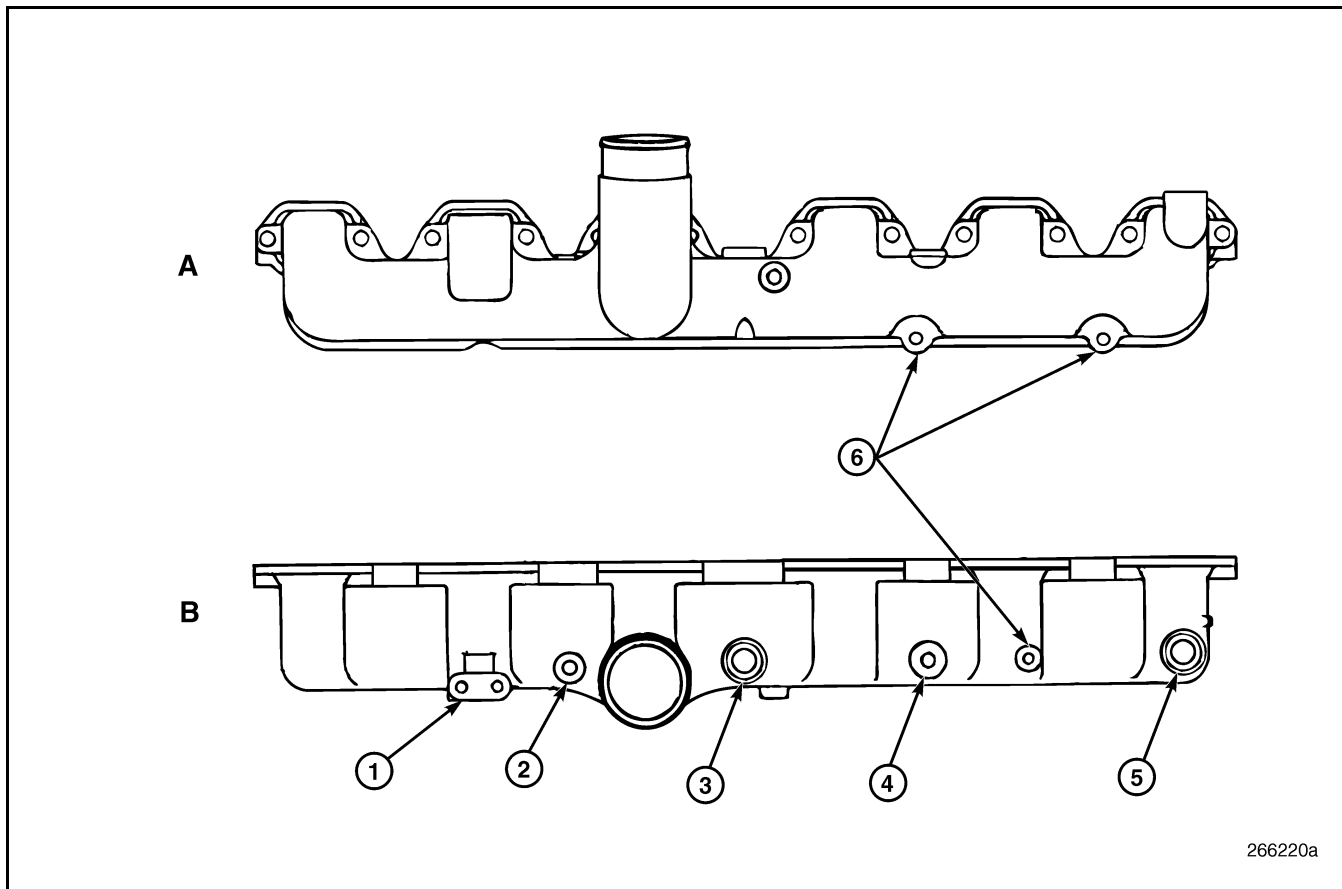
V-MAC Sensor Locations with Center Air Inlet Manifold (Left-Side Mounted EECU)
